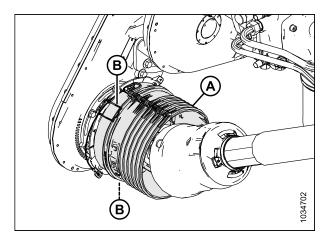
Driveline with Shield Installed on Float Module Gearbox Shaft
